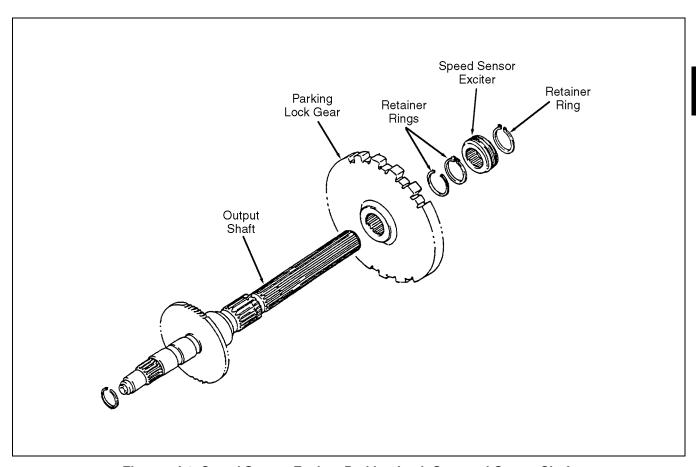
J-6. Speed Sensor Exciter, Parking Lock Gear and Output Shaft
